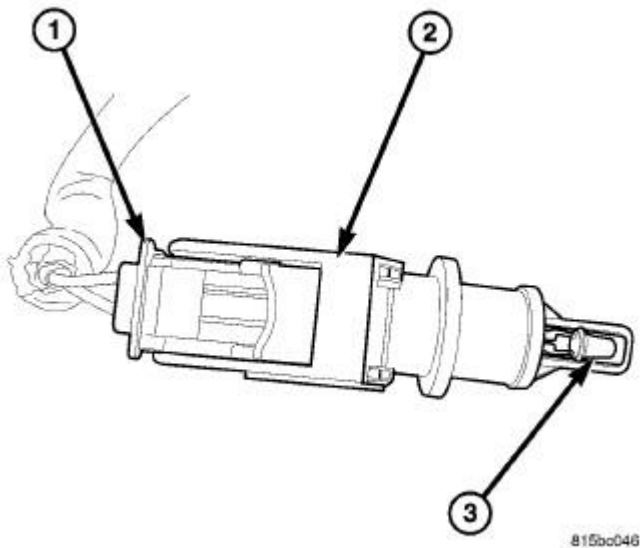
Inlet Air Temperature Sensor, Electrical Connector, And Sensor Probe
